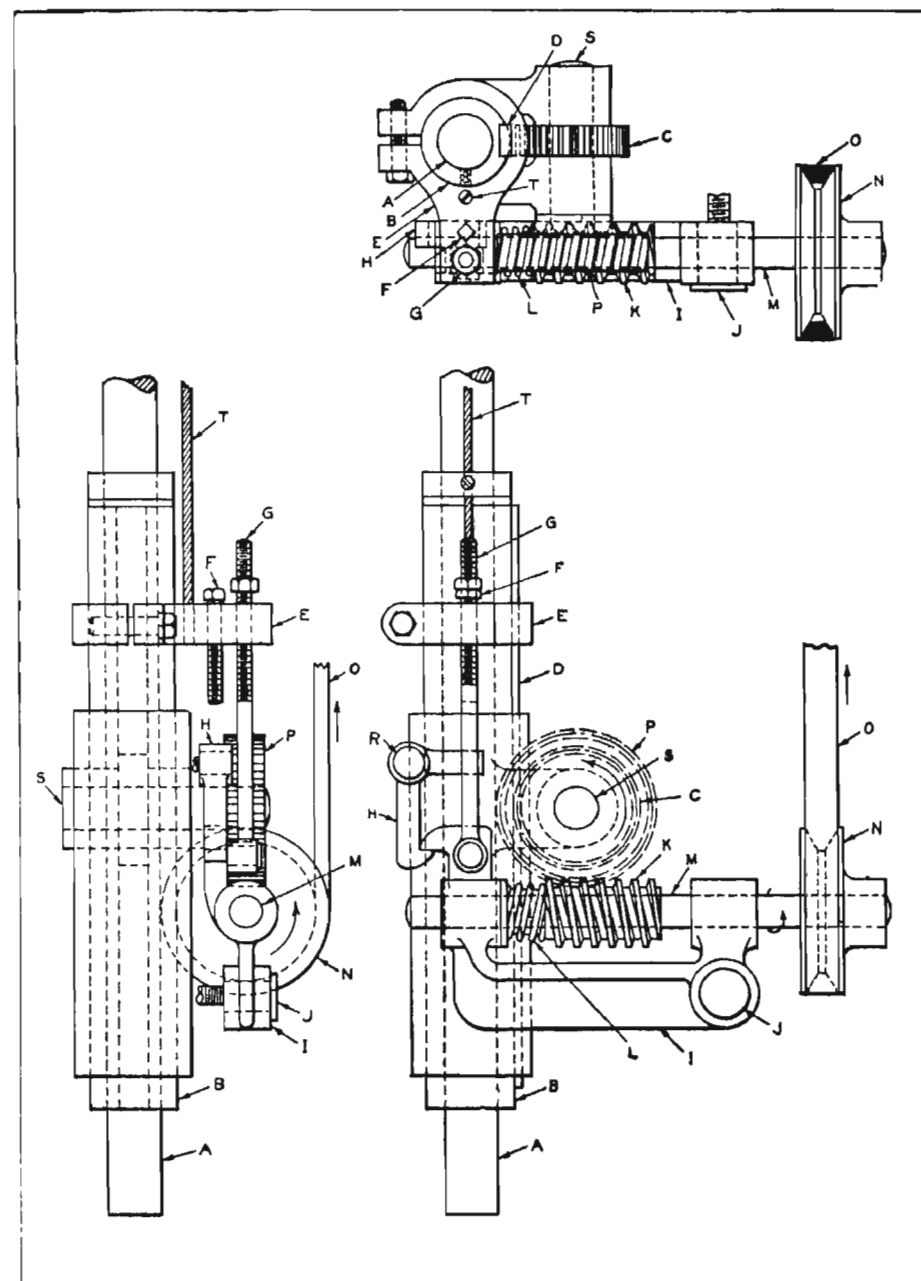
Side, Front, and Top Views of Automatic Feeding and Reversing Mechanism Applied to Drill Press.
